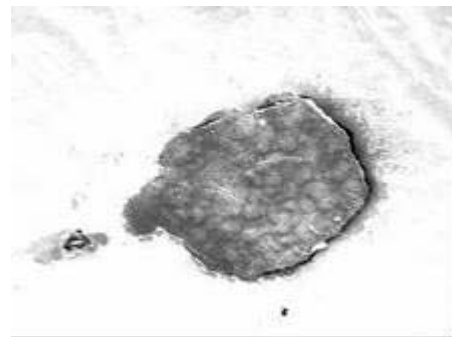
Picture of punched hole in thin metal sheet. (material: Ag)
